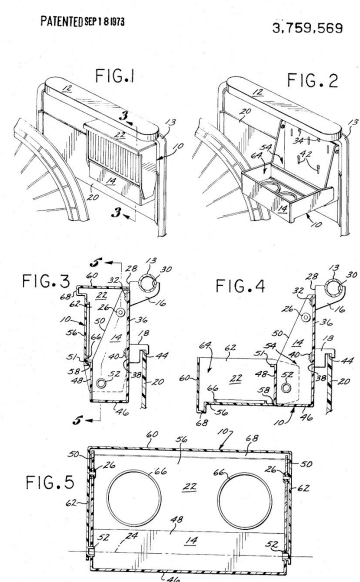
Holder apparatus attachable on a wheelchair for holding a catheter bag and the like [6]
